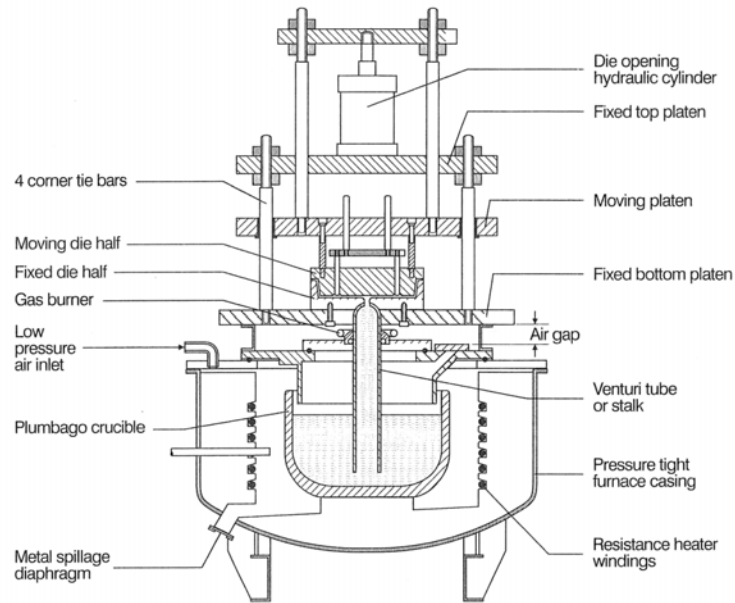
Low-pressure die casting machine construction.<sup>23</sup>
